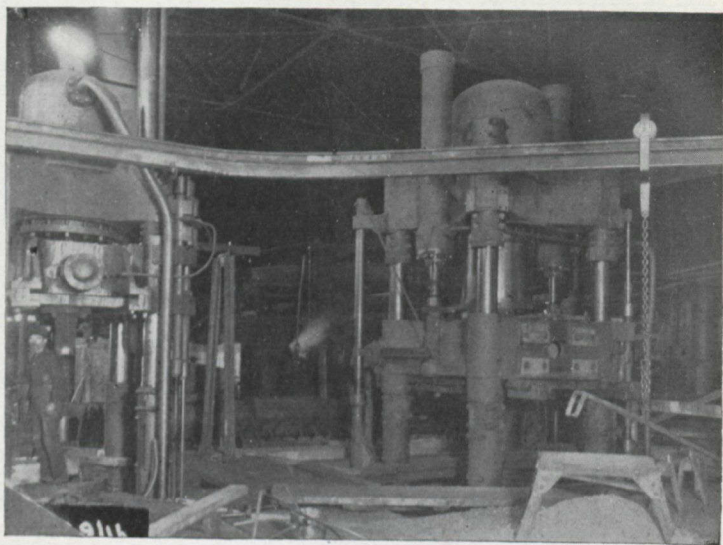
Nova Scotia Steel Co. Forging Plant.
